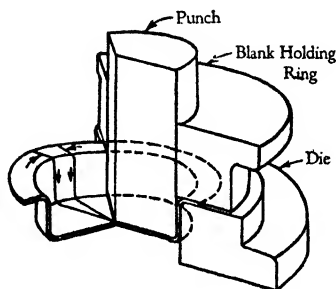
A typical drawing operation. The metal is plastically rearranged by pulling and crowding in the area between the blank-holding ring and the surface of the die.
